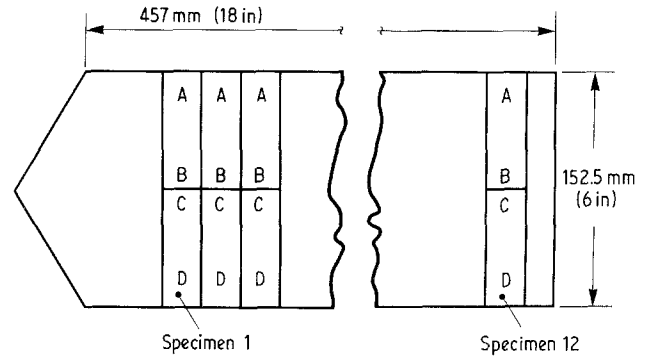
Layout showing where weld specimens were cut from 152.4 mm × 457.2 mm M-PPO-SF moulded plaques.
